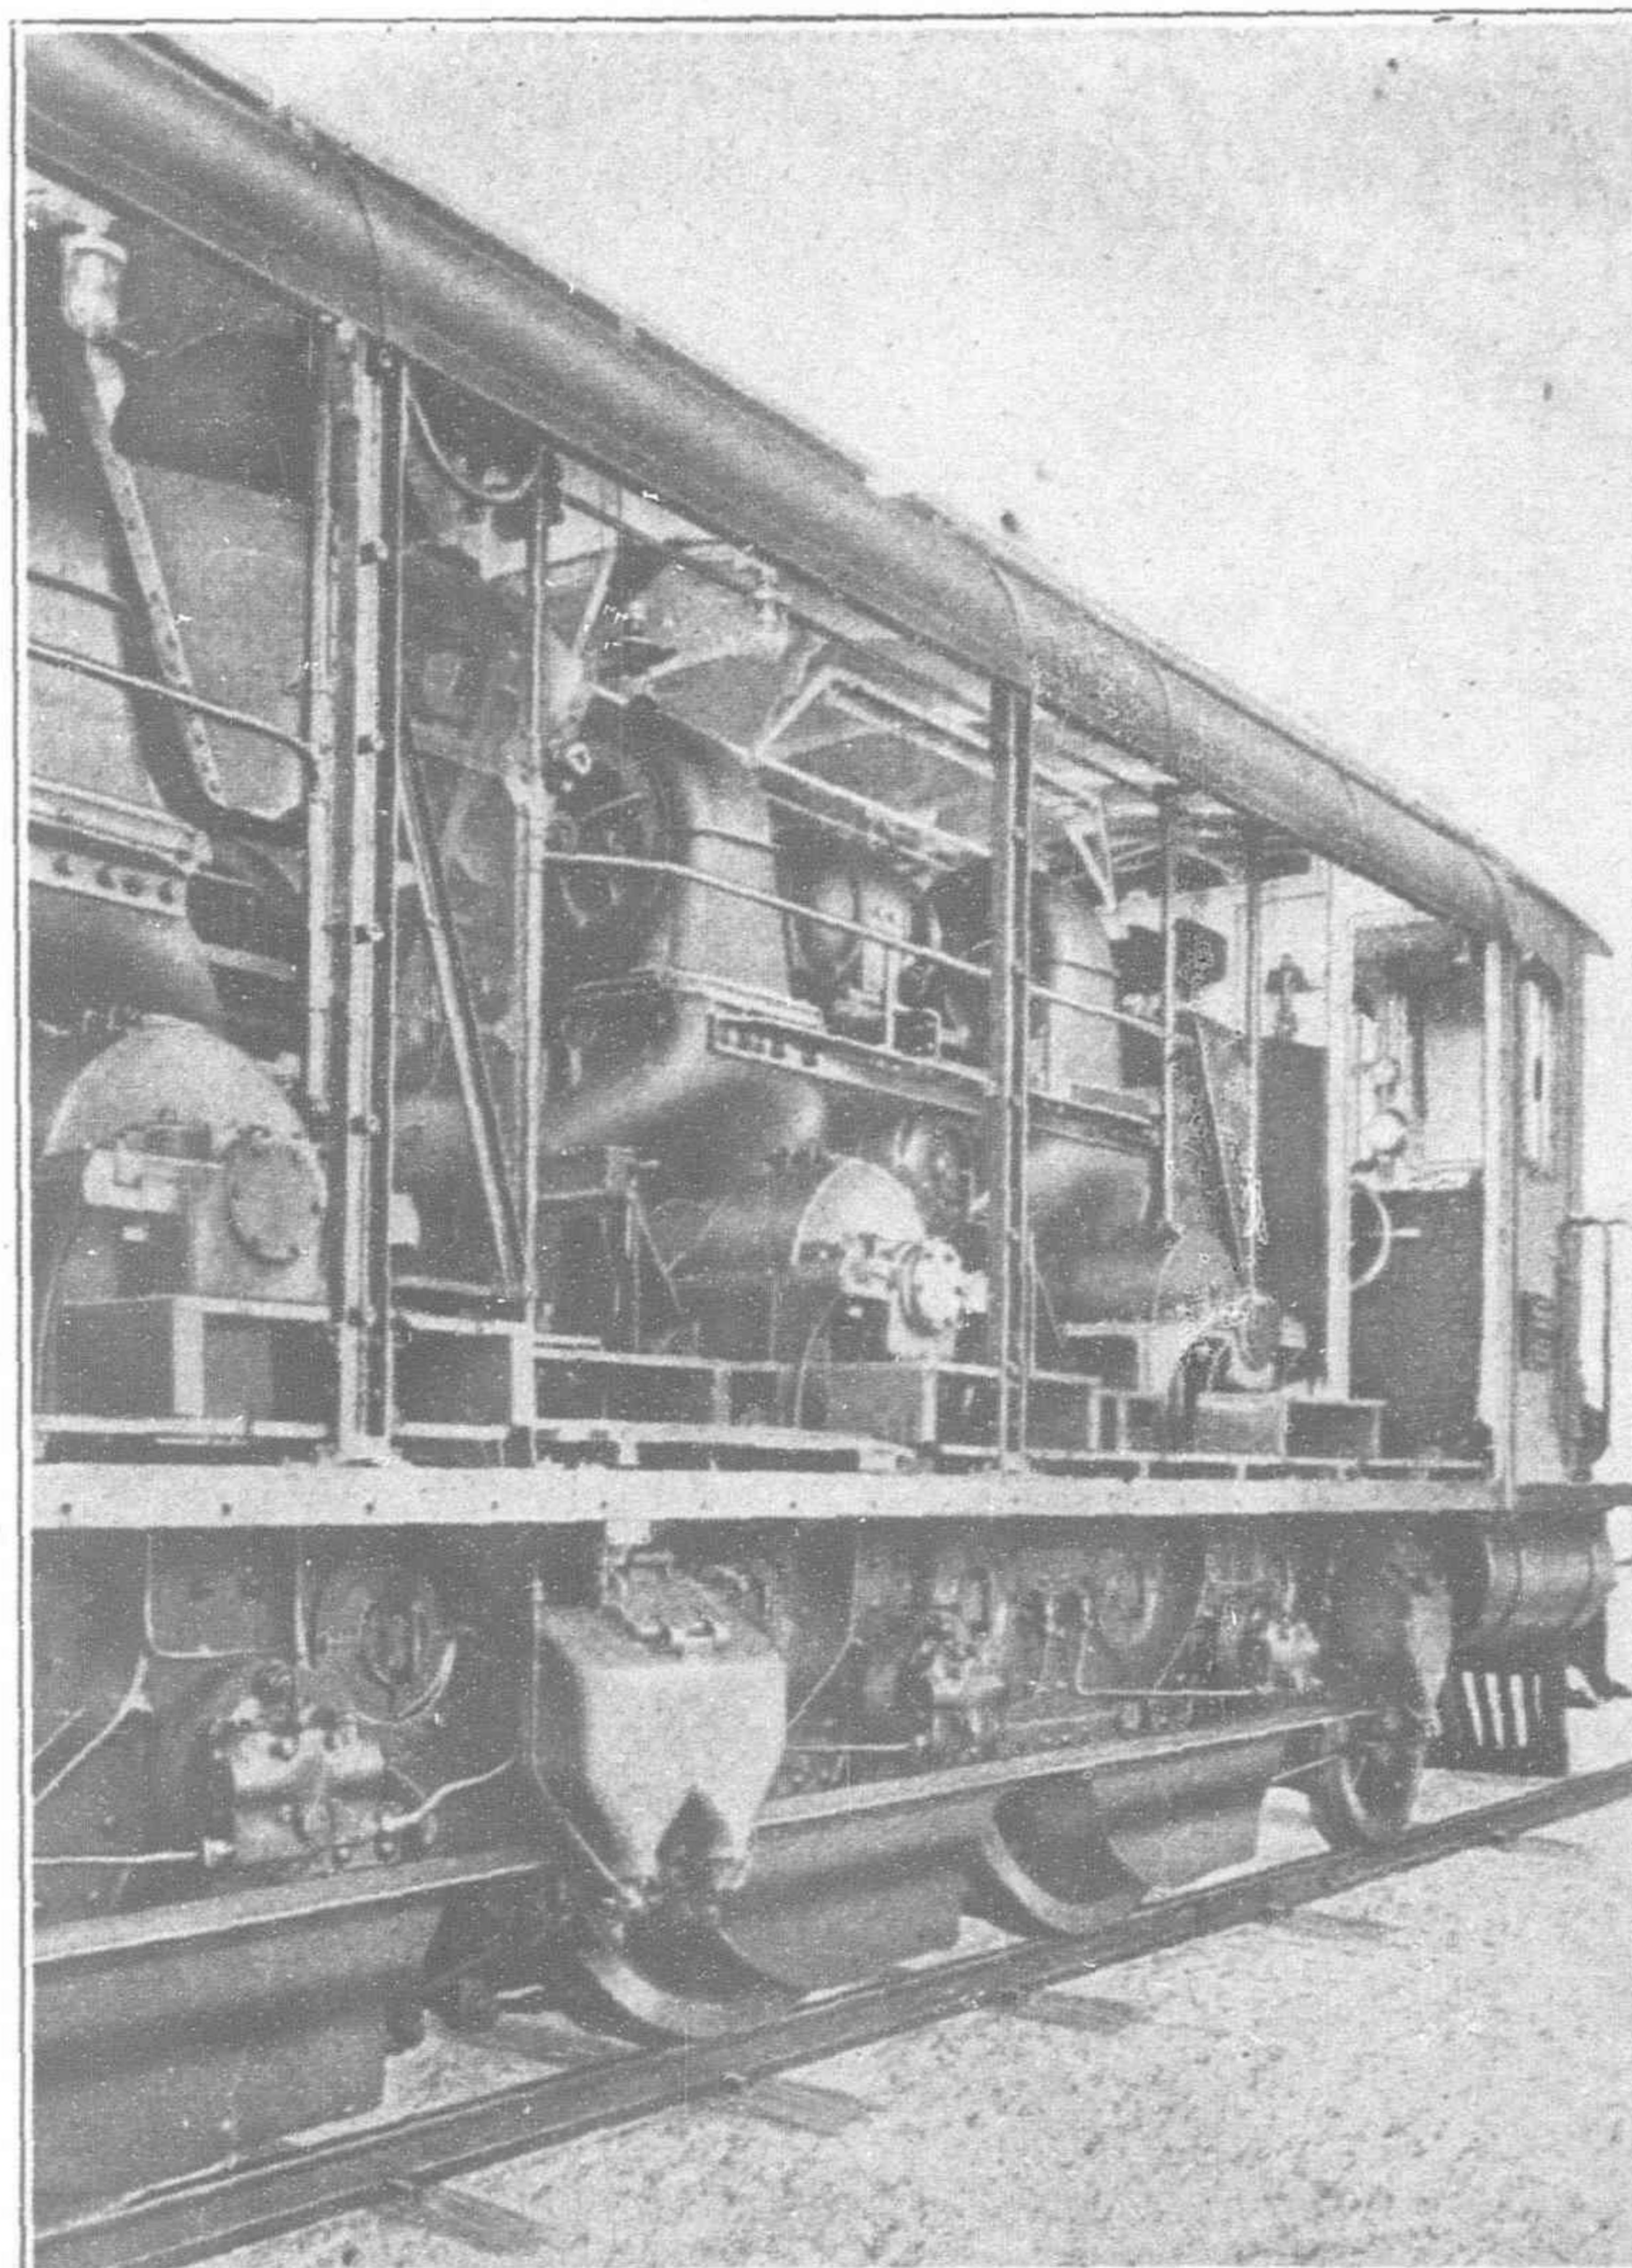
Locomotive with Side Panels Removed, Showing Machinery
